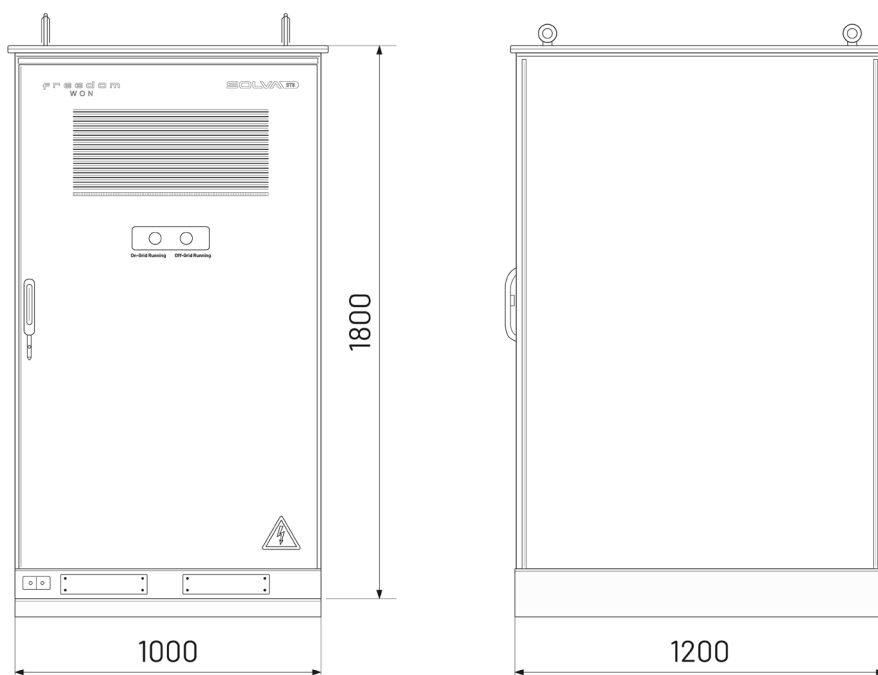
Dimensions of the SOLVA STS 4IN cabinet
